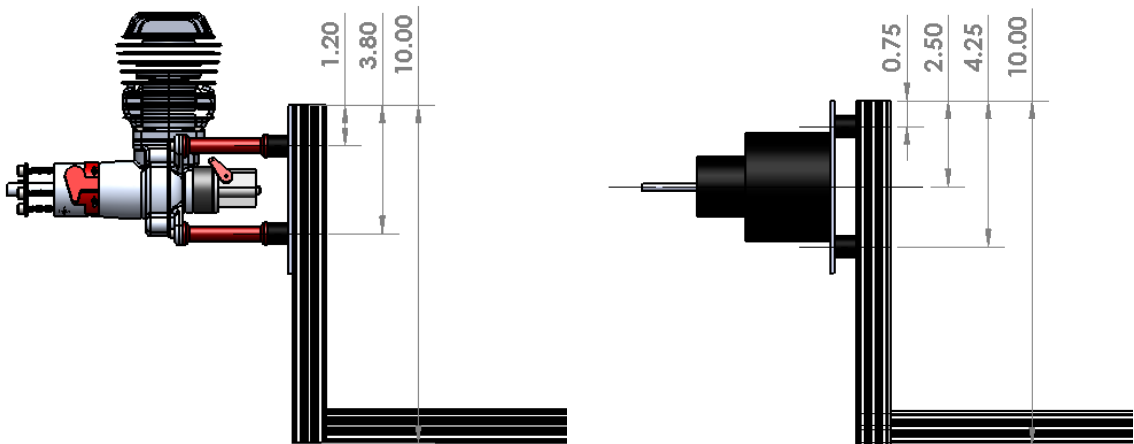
Dampener placement on engine and electric motor test stand, dimensions in inches.
